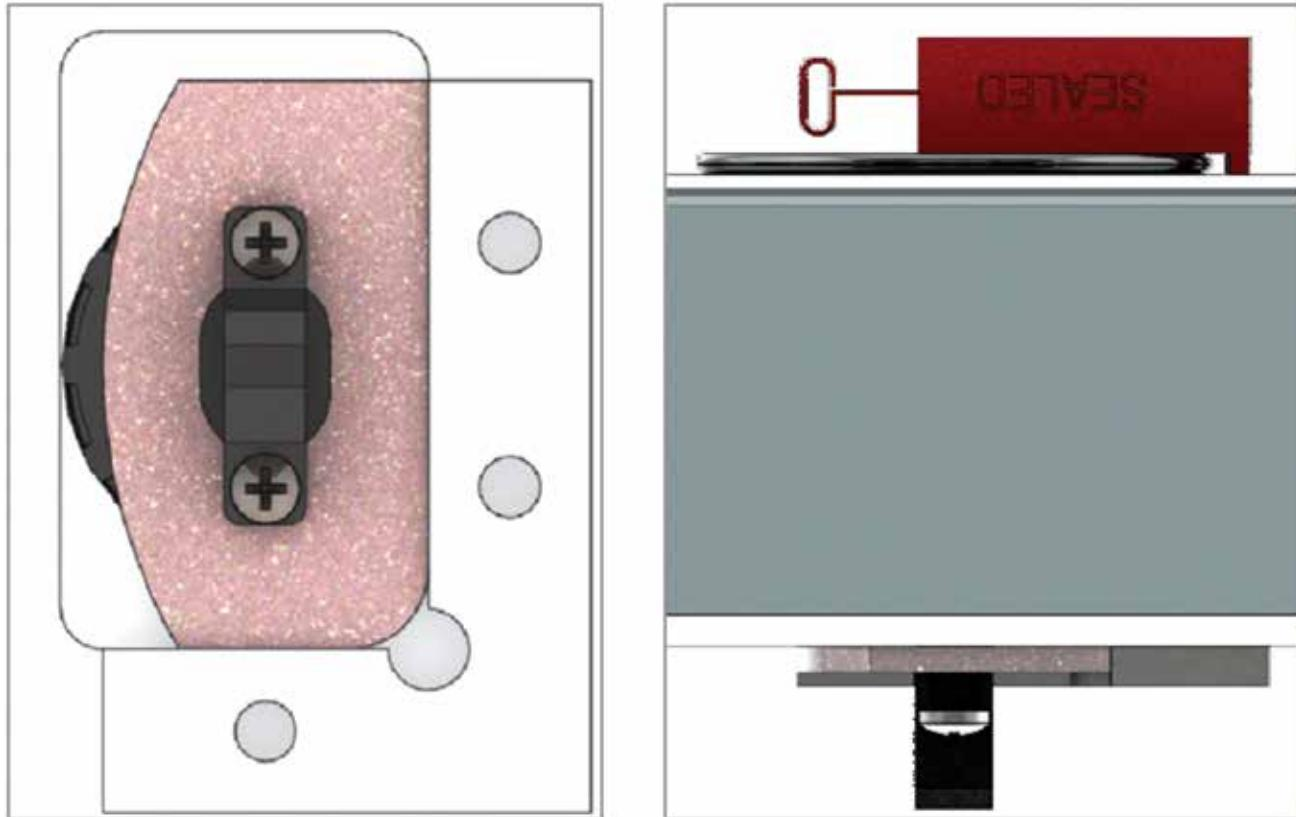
Correctly Seated Optical Switch Bottom and Side View
